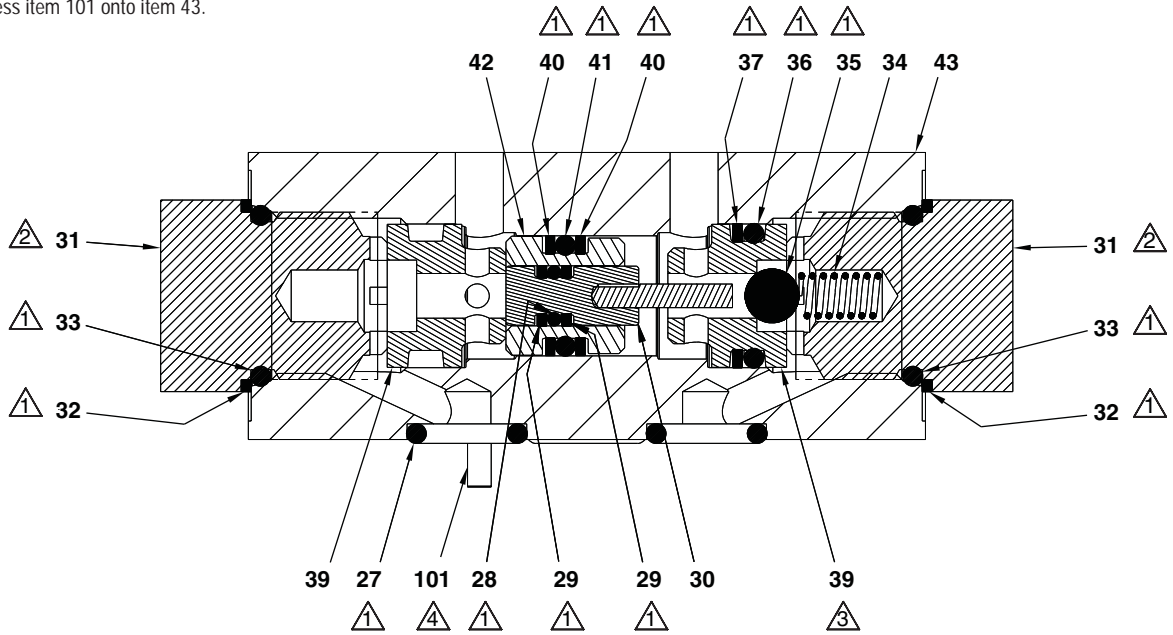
, DC7424950SR Locking Power Seat Assembly (VM43-LPS)
